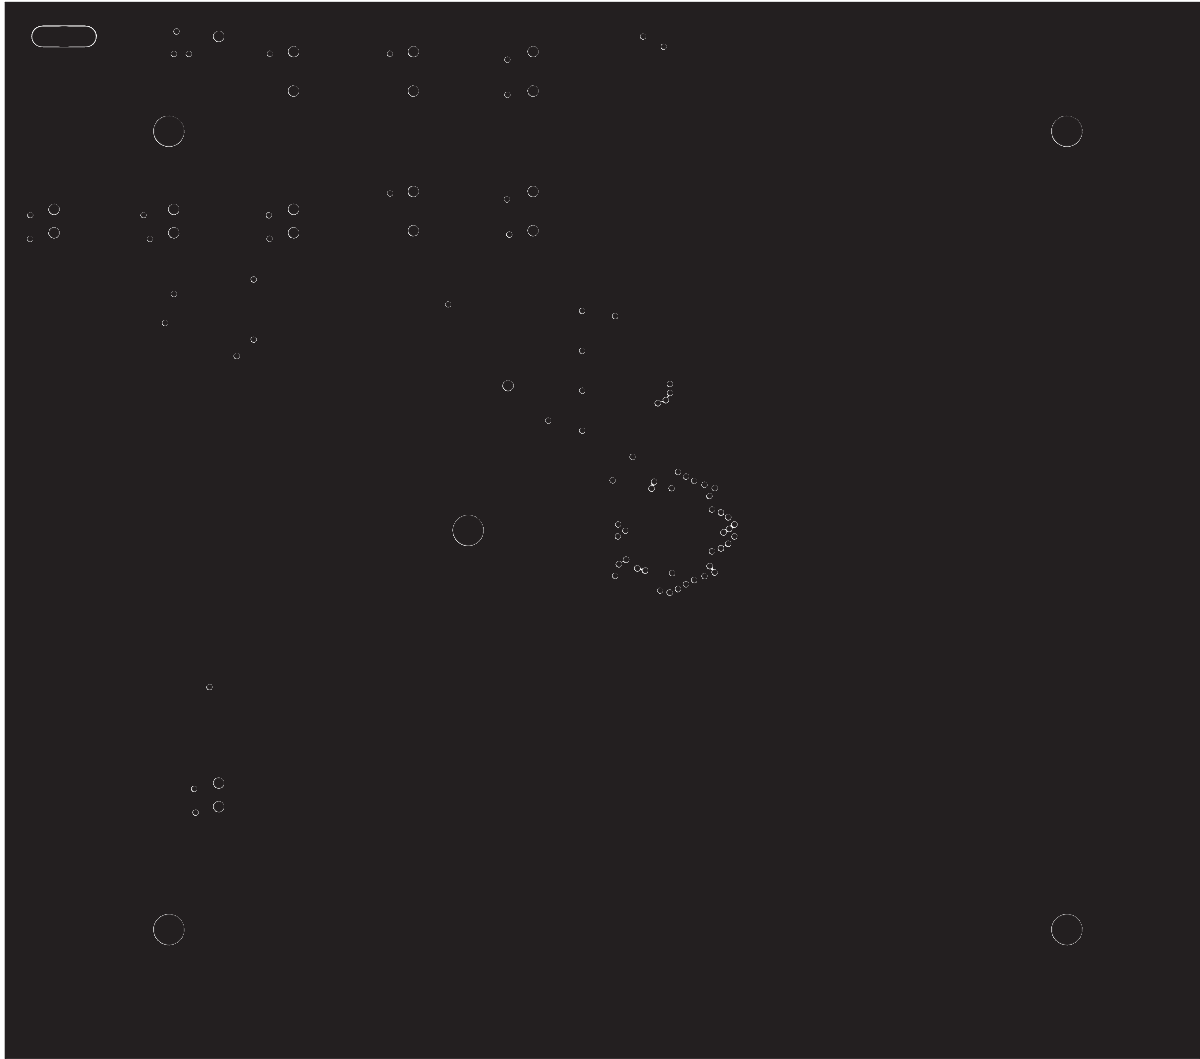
MAX3678 EV Kit PCB Layout—Ground Plane
